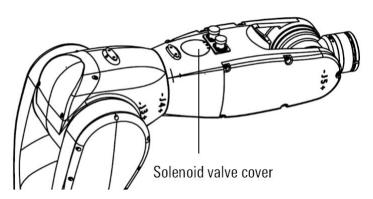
The position of the solenoid valve cover on the arm of AIR8-710A manipulator
